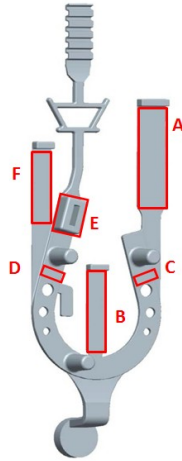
Six visually inspected zones of the *horse shoe*-shaped Casting: (A) stepped wedge, (B) first bending test appendix, (C) left holes, (D) right holes, (E) hollow thick area, (F) second bending test appendix.
